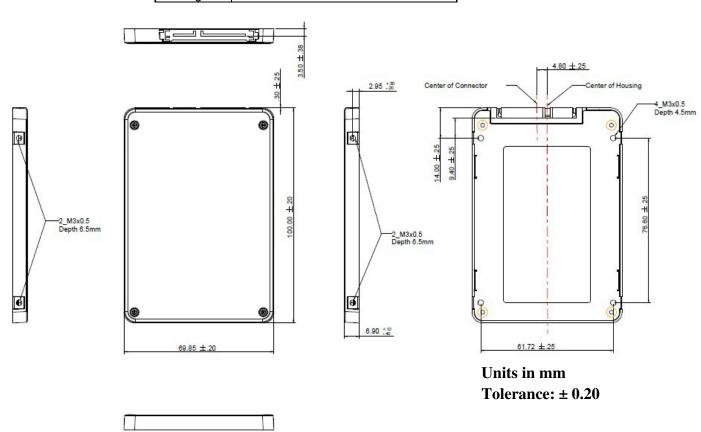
SFD25N-M with 7mm Housing physical dimensions
